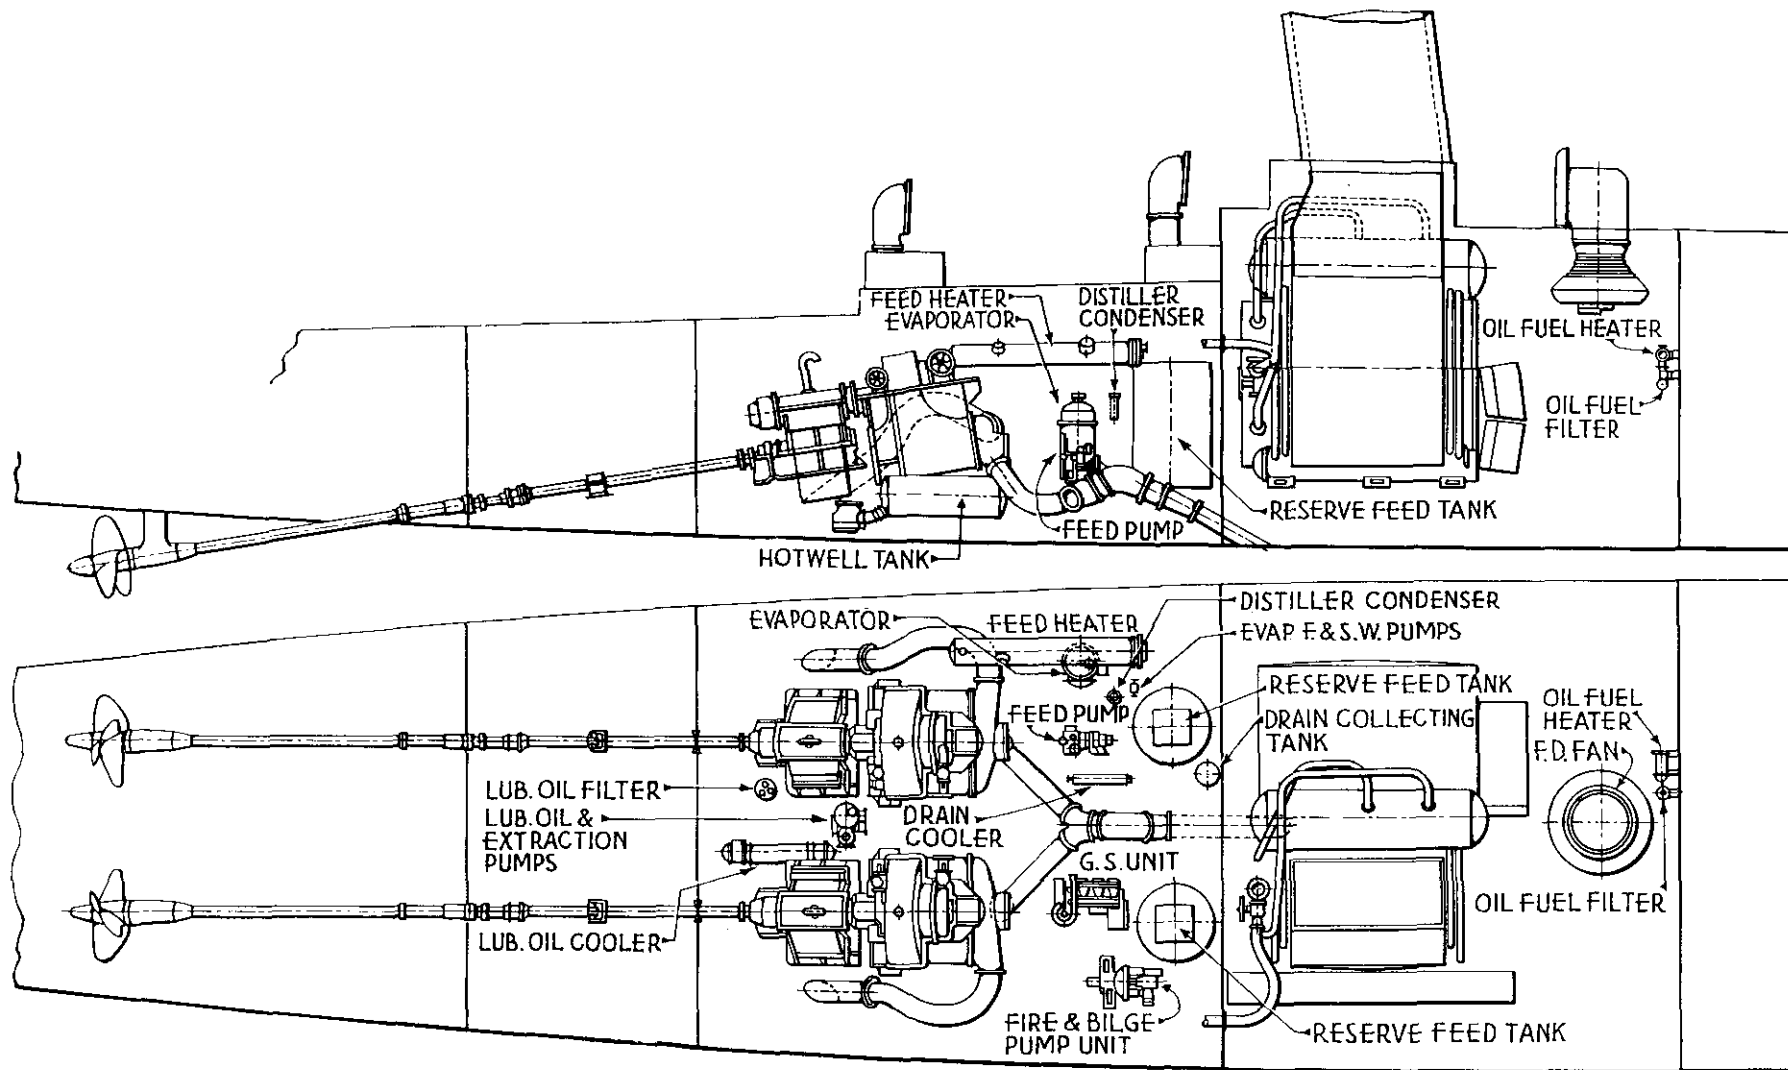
GENERAL MACHINERY ARRANGEMENT
